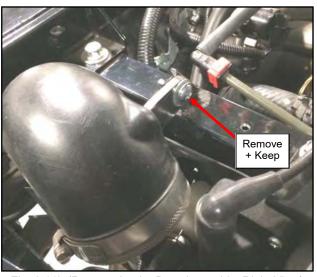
(Remove Intake Duct Assembly, Right View)
